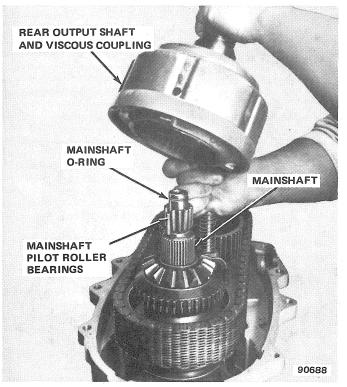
D-48 Viscous Coupling and Rear Output Shaft Removal/Installation
